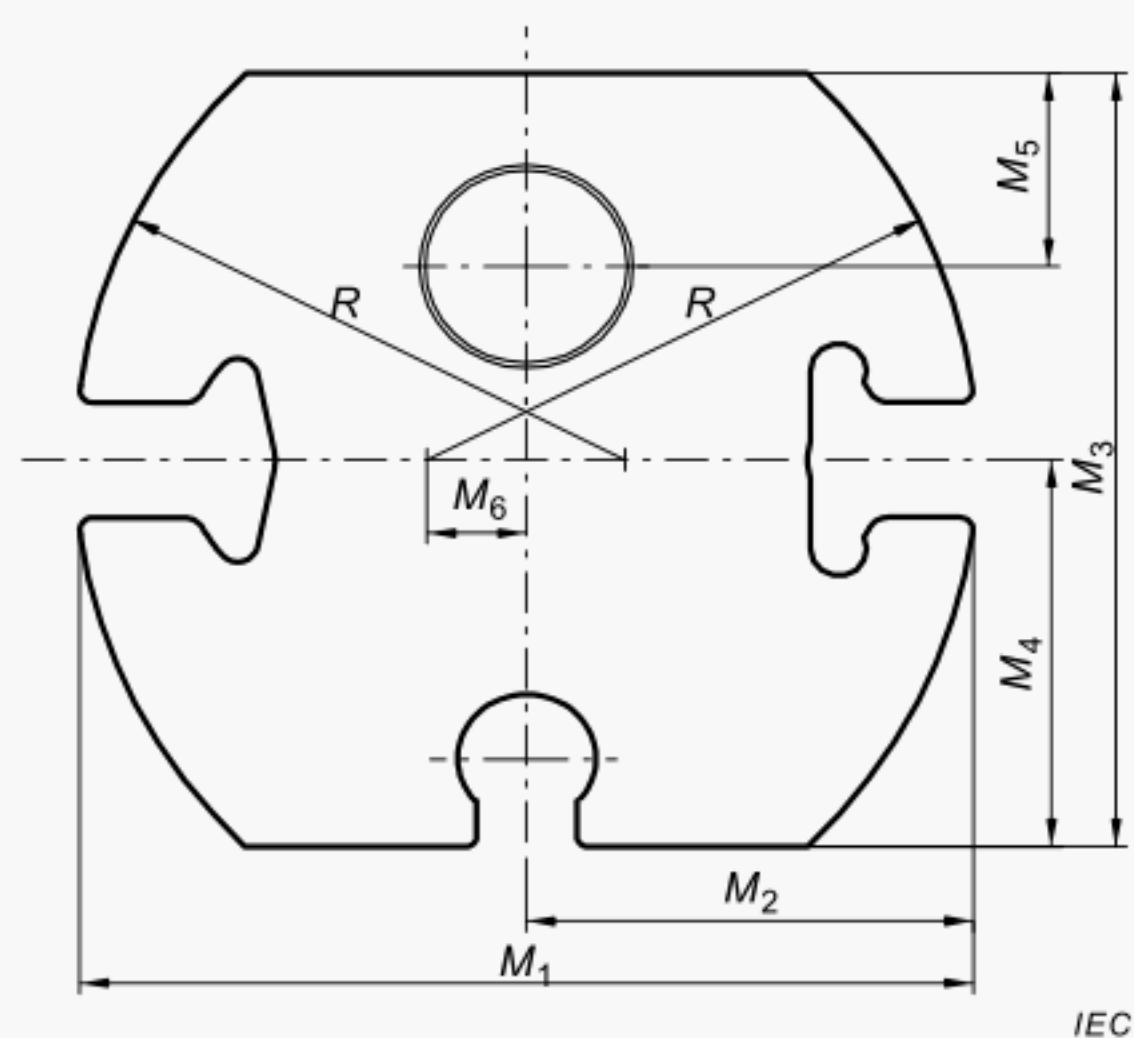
Dimensions of gauge for ball coupling size 22N
